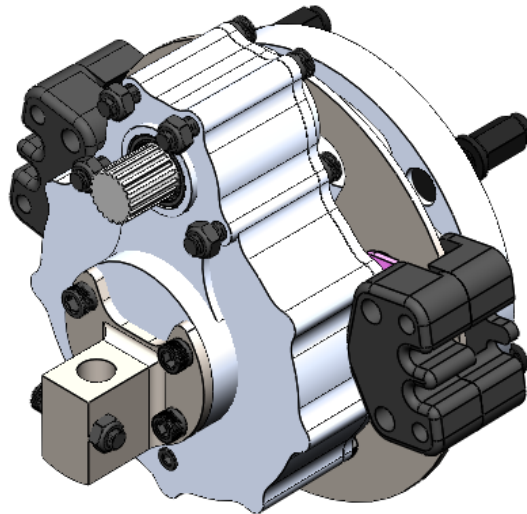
Portal gearbox for the 2023 Union College BAJA racing team car. The half shaft supplies power to the splined shaft at the top of the gearbox. That shaft spins a gear inside the portal which is connected to a larger gear. This larger gear is connected to the hub (circular flywheel at the back of the portal) which in turn connects to and moves the wheels.
